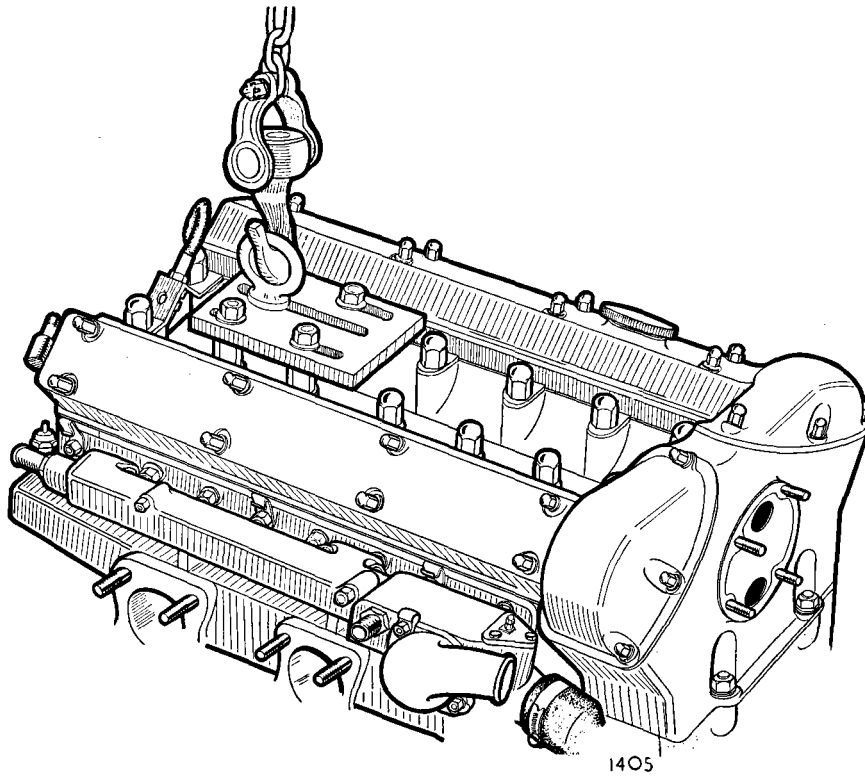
Showing the lifting plate, Churchill tool No. J.8 in position on the cylinder head studs.
